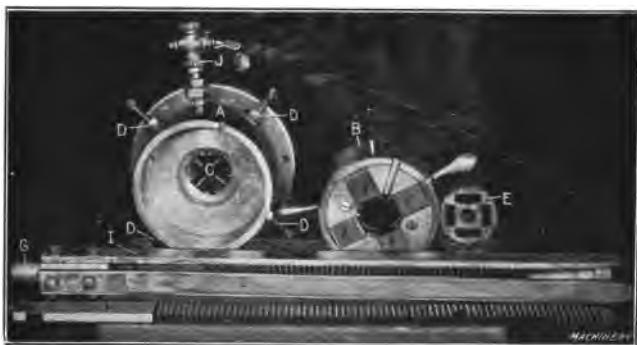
The Broaches and Broaching Fixture used for the Operations Illustrated in Fig. 35
